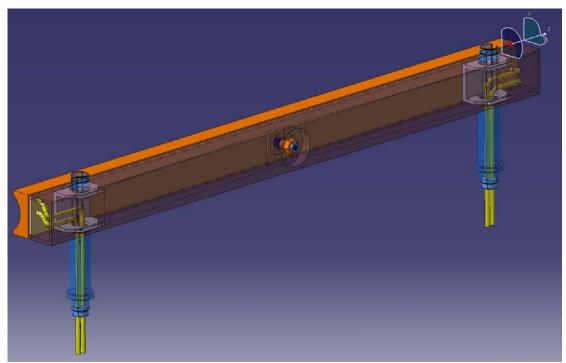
3D view of the jaw assembly with new design of cooling system that has been machined directly on the jaw; pipes have circular cross-section.
